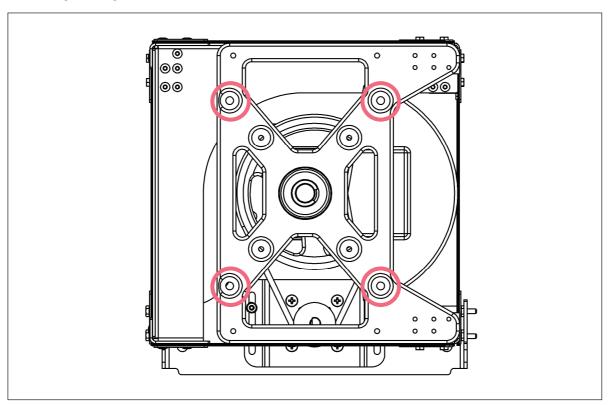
Upper bearing housing with platform screw locations (top view)
